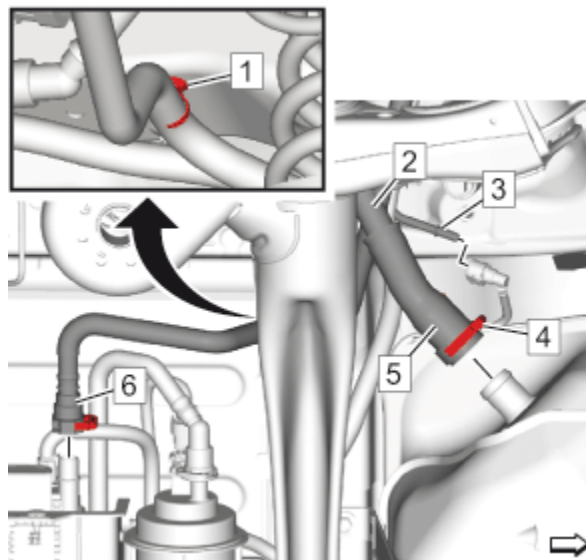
Evaporative Emission System Vacuum Leak Pump Filter Pipe, Fuel Tank Filler Hose, Vent Pipe, Clamp And Retainer
